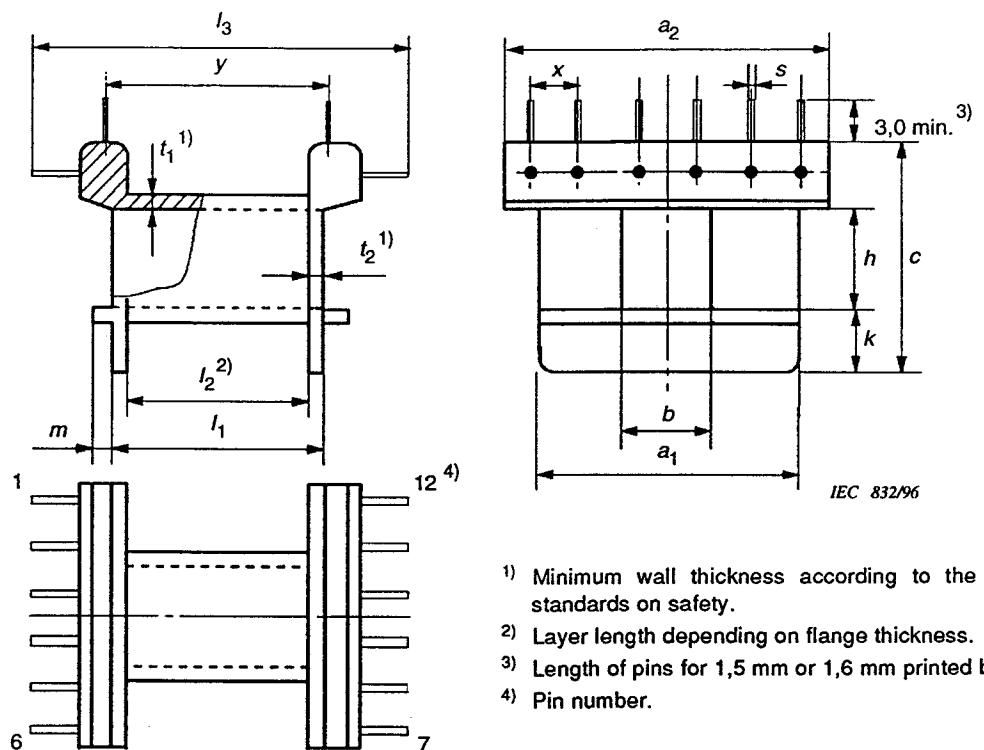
YM 1 coil formers for printed wiring board mounting, level mounting style
